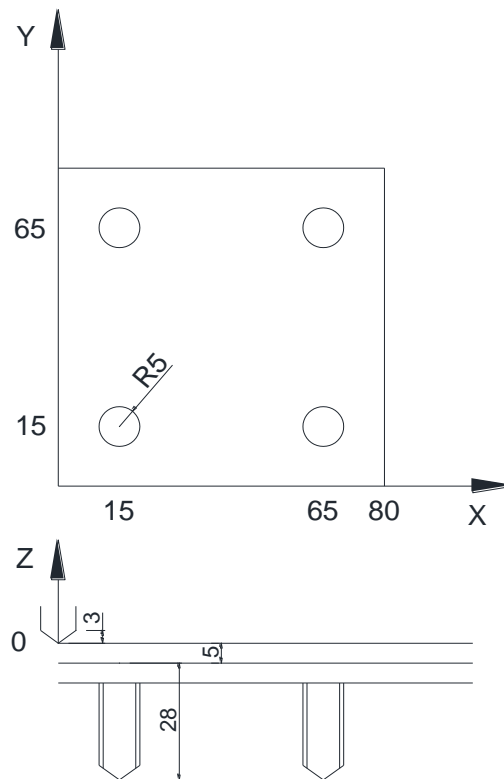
Sketch 4 of Workpiece Machining Process
